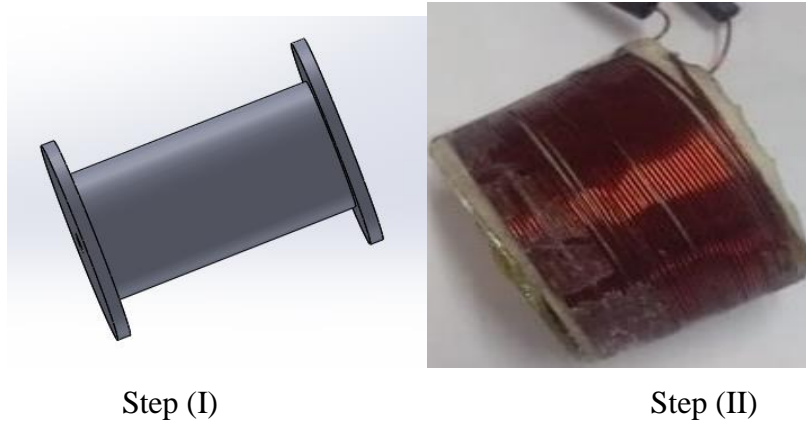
Step (I) CAD design of a cylindrical coil. Step (II) Developed coil after winding.
